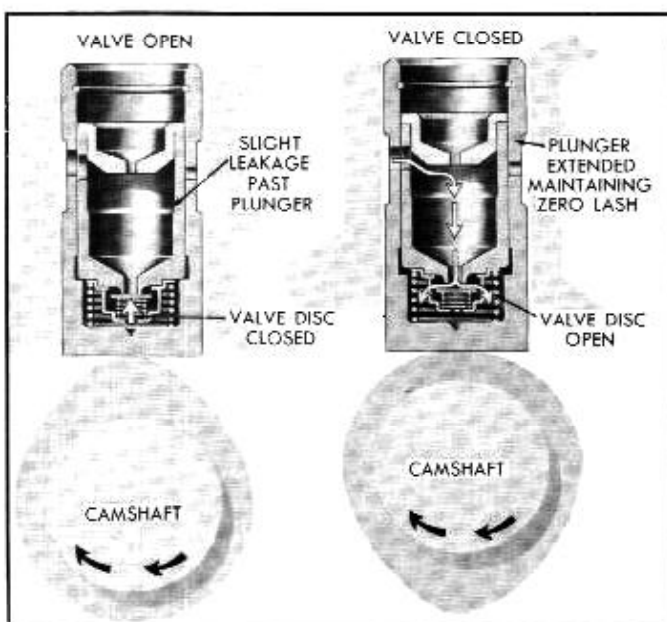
C-122—Operation of Hydraulic Tappet Assembly
